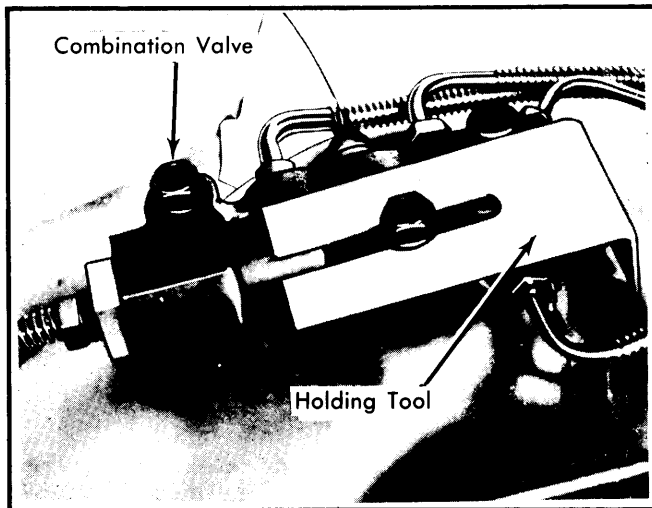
Deactivating Metering Valve for Bleeding (Typical Method and Tool)
